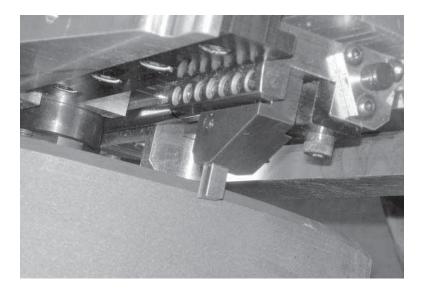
Turn the starwheel until the tool bit is positioned at the required start point.
